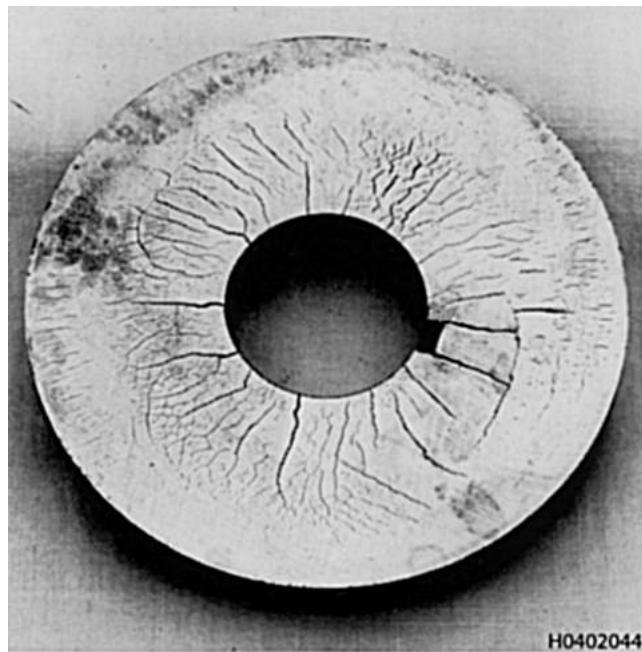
Magnetic Particle Indications of Grinding Cracks in a Stress-Sensitive, Hardened Surface
